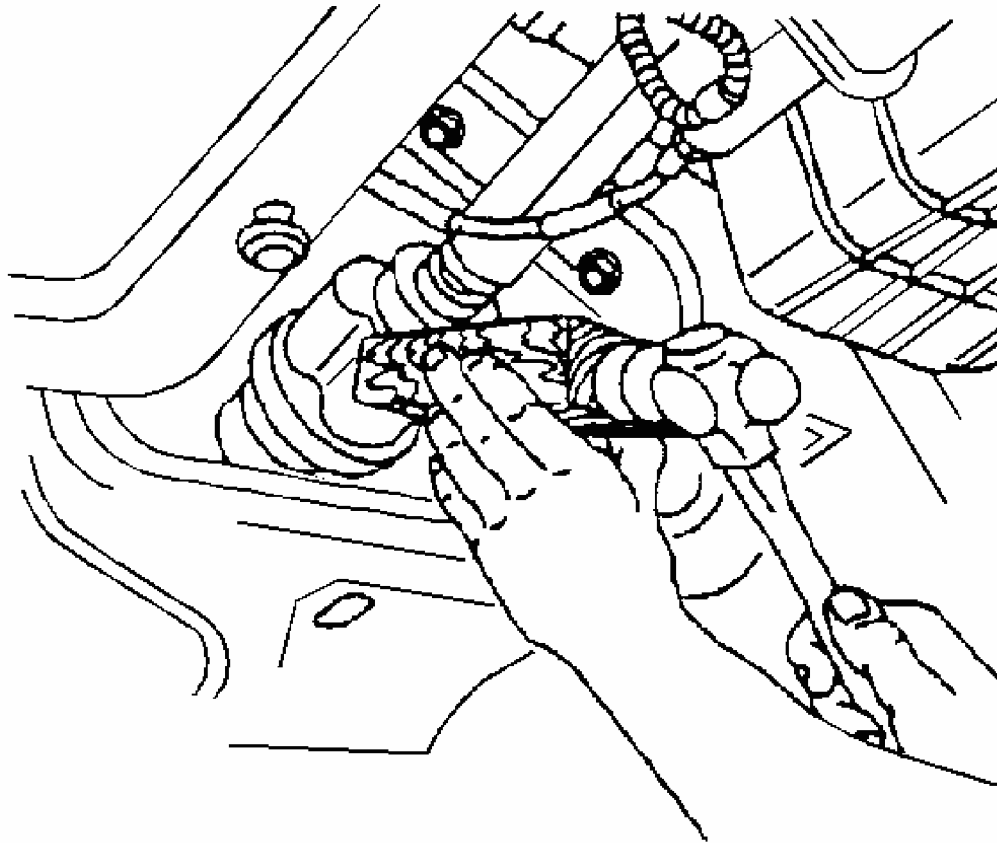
Disconnecting Right Side Wheel Drive Shaft From Differential Carrier
